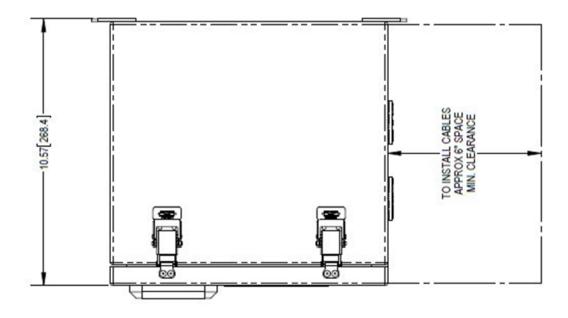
4-0700-149: Installation drawing, integrated system with explosion-proof housing and water-cooled jacket
